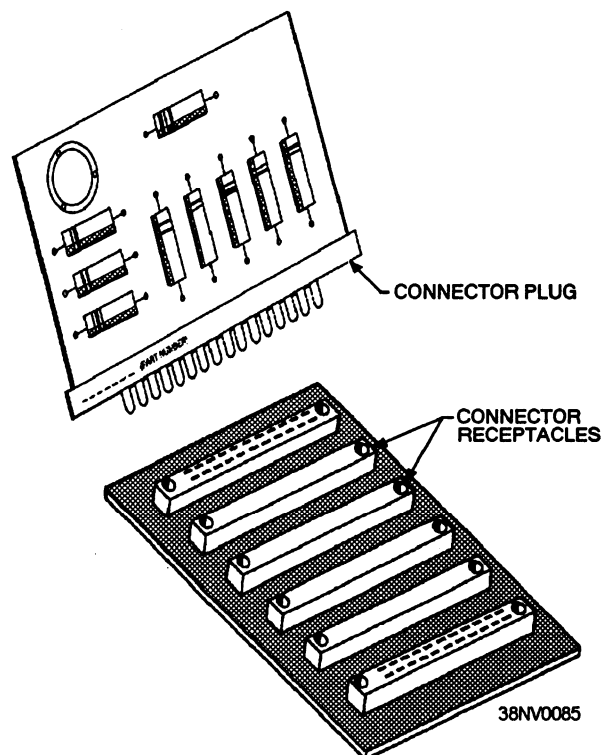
Two-piece plug and receptacle pcb connector.
